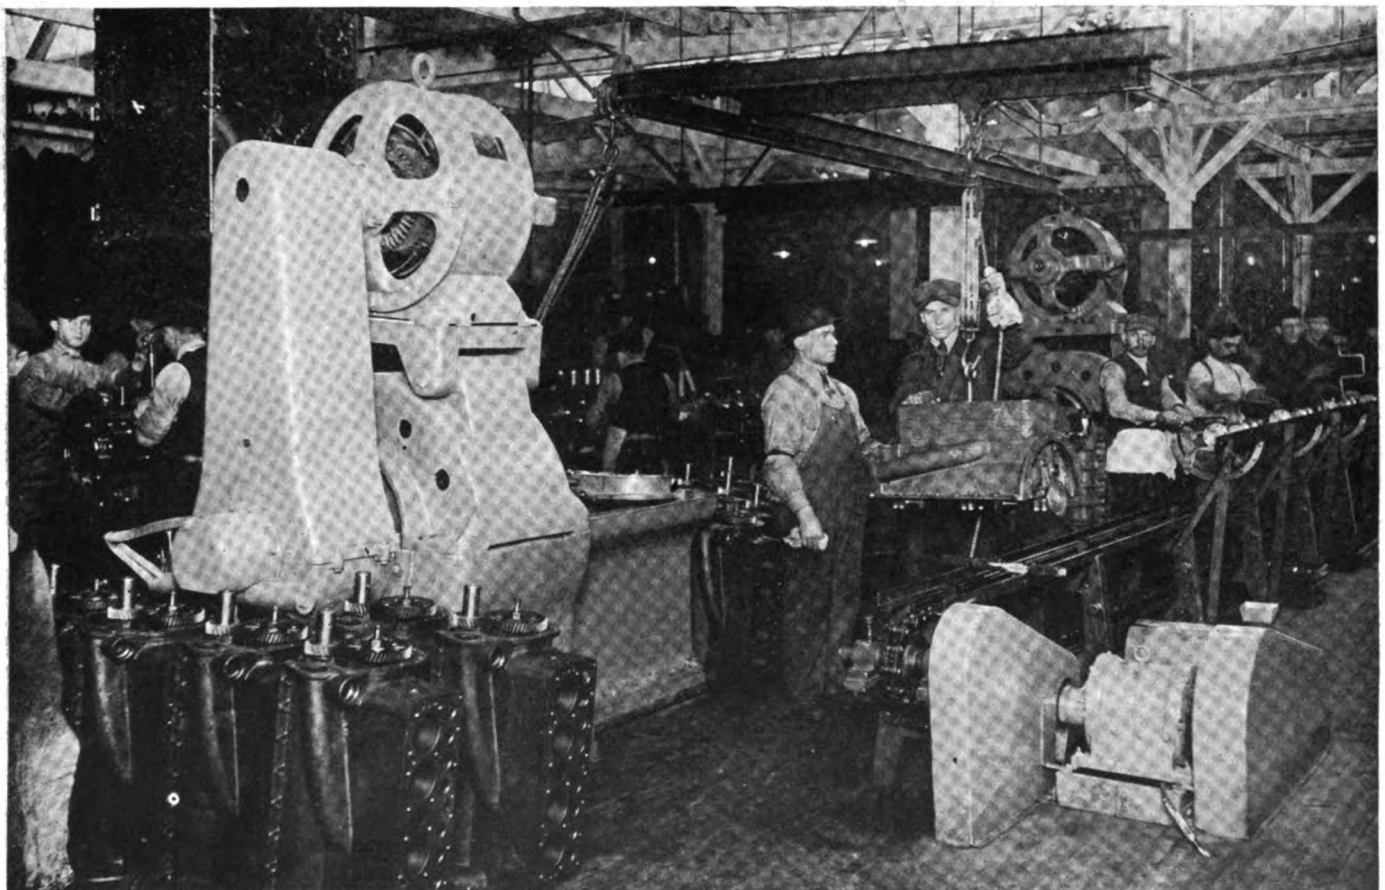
Cylinder blocks leaving end of bearing adjustment chain and being carried by overhead conveyor to burning-in machine
